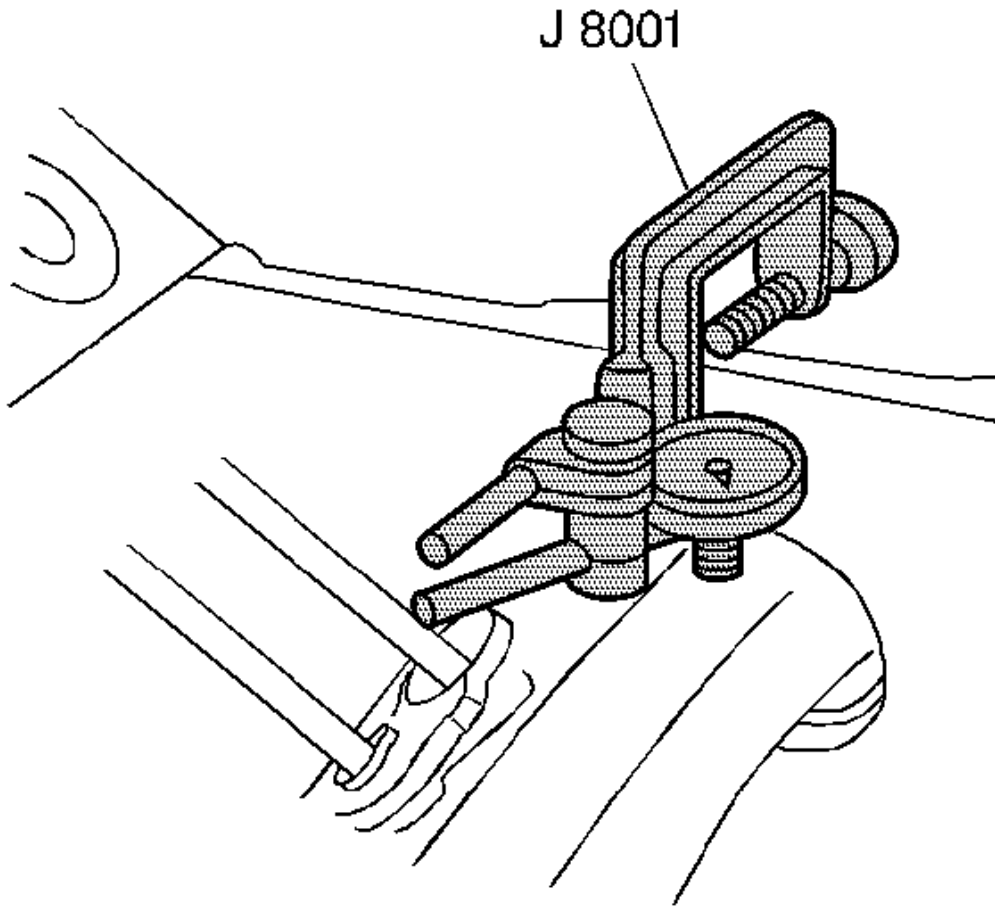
Measuring Balance Shaft Radial Play in Rear with J 8001
